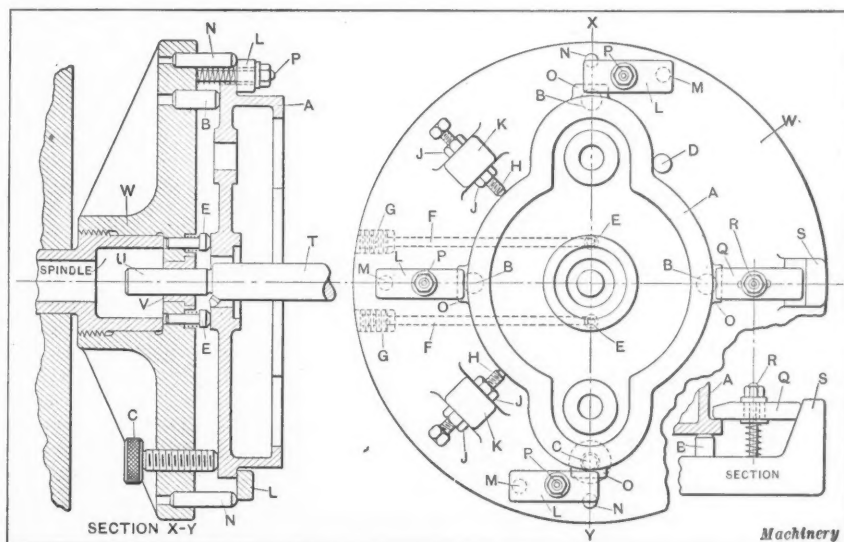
Fixture employing Three Fixed Locating Points *B* and One Adjustable Point *C
